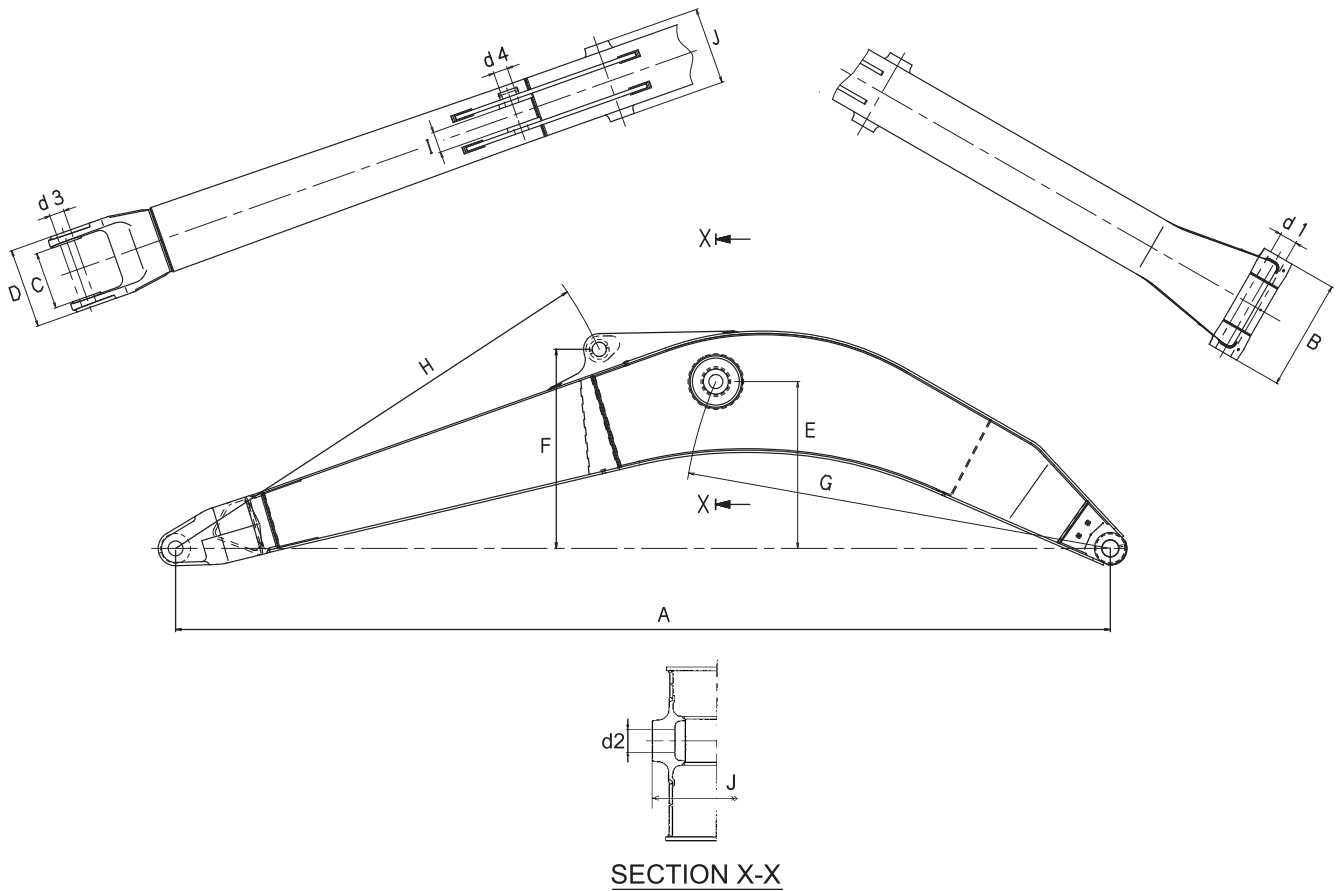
Boom dimensional drawing (Shown in SK200-8)
